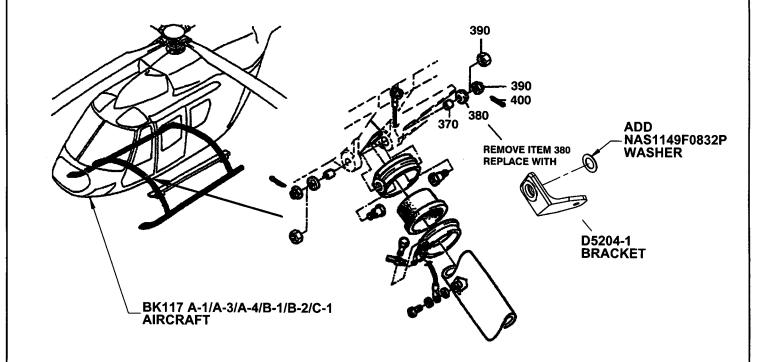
D5204-1 BRACKET INSTALLATION (LH INSTALLATION SHOWN, RH OPPOSITE)
